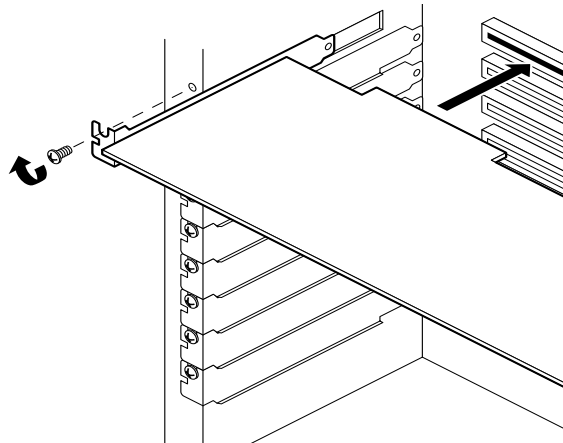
Installing a PCI Add-in Board, Component-side Down
